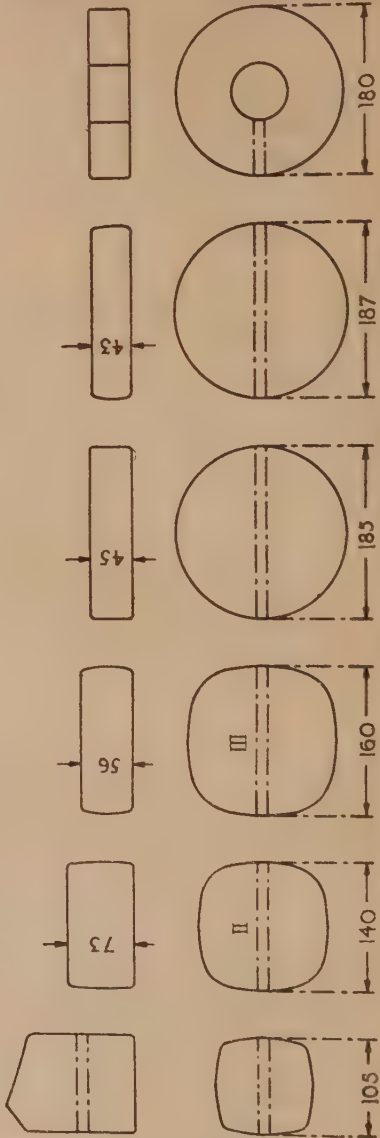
Successive Steps of Forging 180-Millimetre Ring in Eccentric Press.
